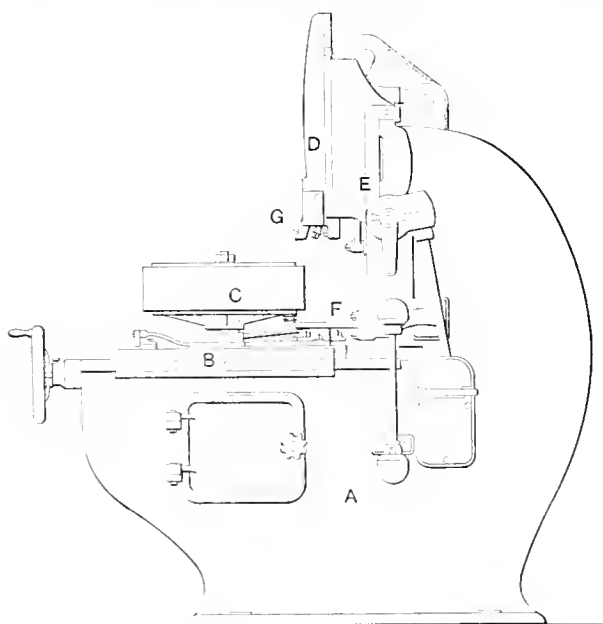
Elevation of a French Spur Gear Generating Machine employing a Rack Tooth Form of Shaper Tool.
